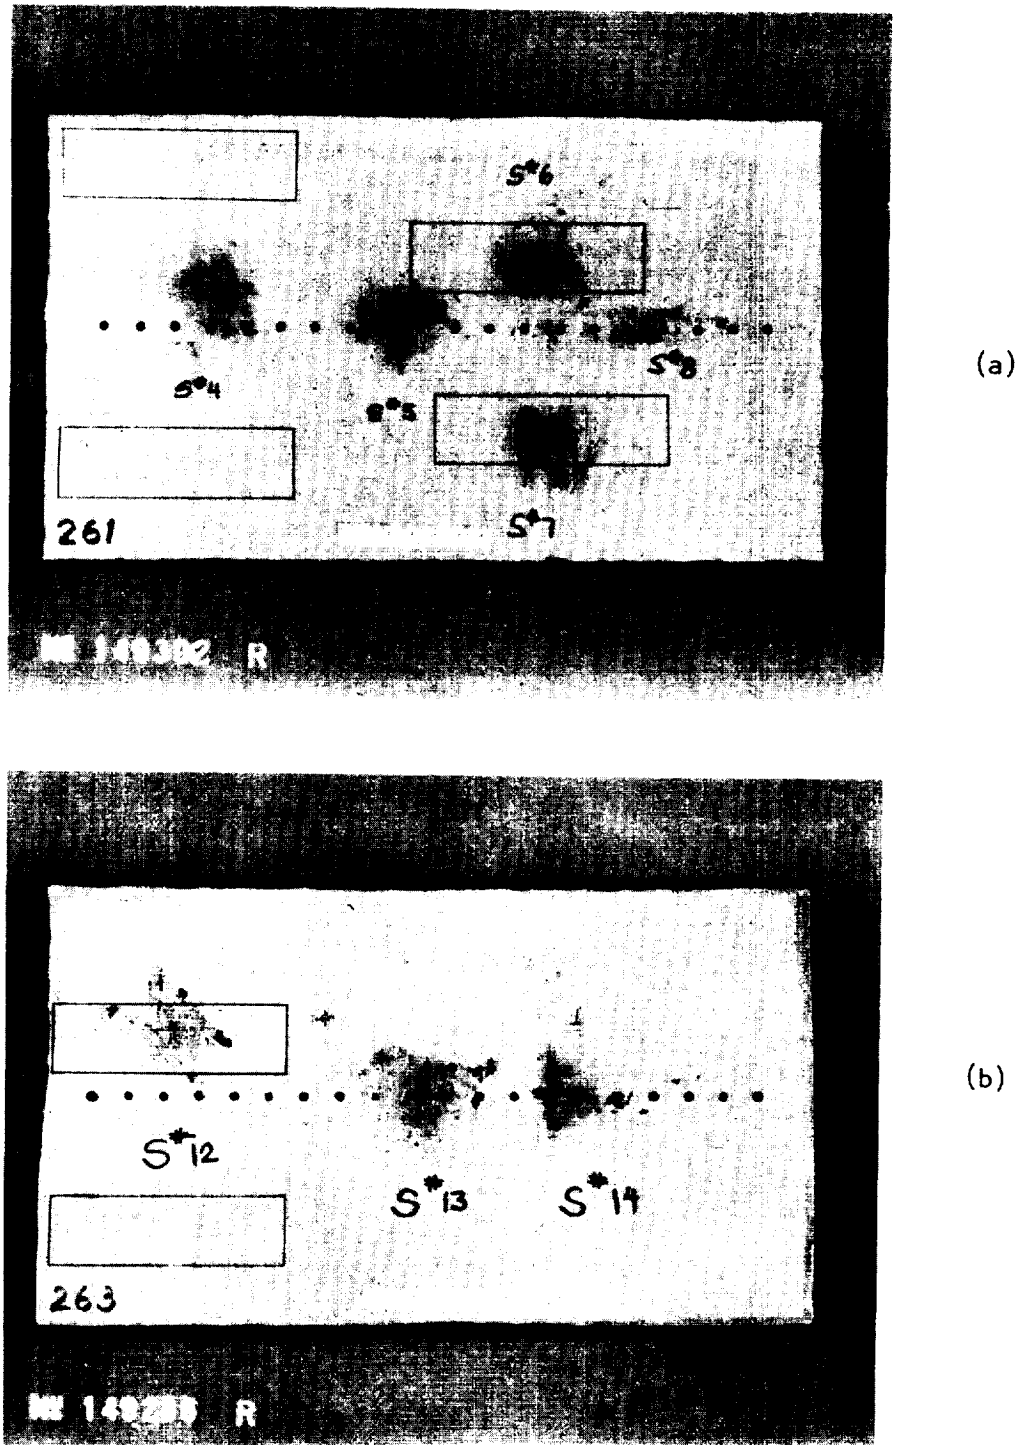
Compression test specimen locations on lightning strike panels: a) Panel 261, b) Panel 263.
